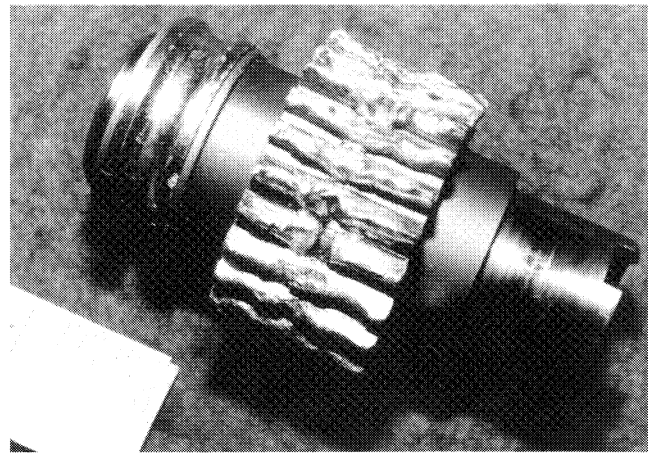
Overall View of the "Pinion Gear, Showing the Inner Race of the Broken-Up Ball Bearing Assembly Still Installed. The Teeth Seen Here Are Badly Mutilated, But None Are Broken Off.
